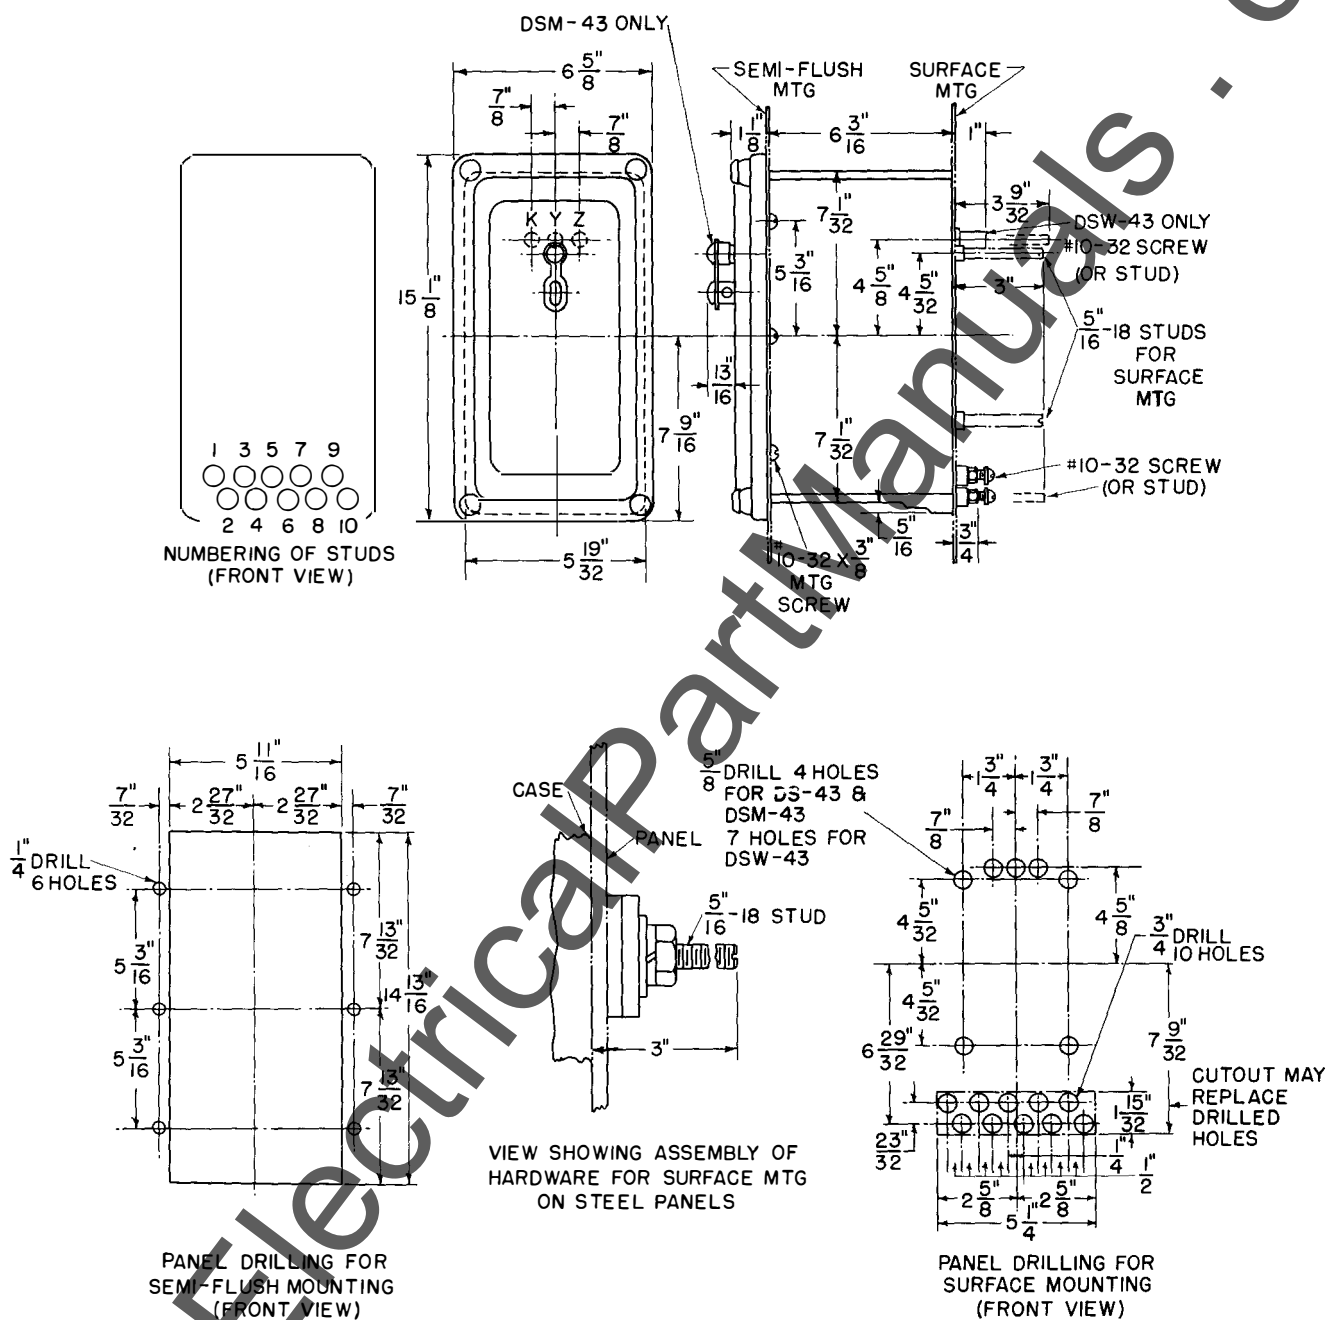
Dimensions for Types DS-43, DSW-43, and DSM-43
